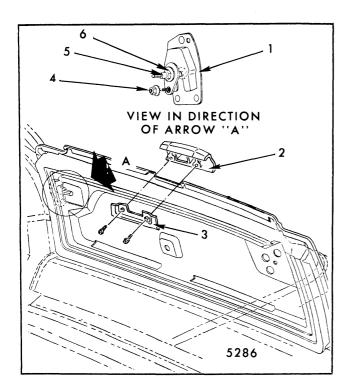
Tail Gate Lock Striker and Grip Handle Assemblies
